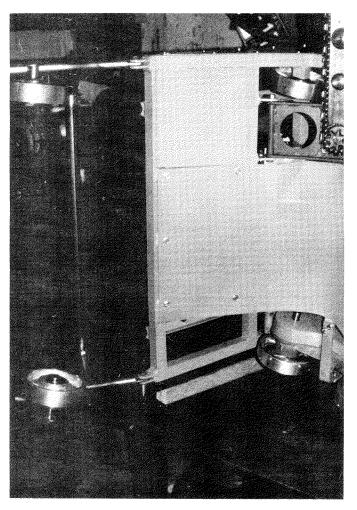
Tree Saw I Drive Wheels and Idler Mounting.
